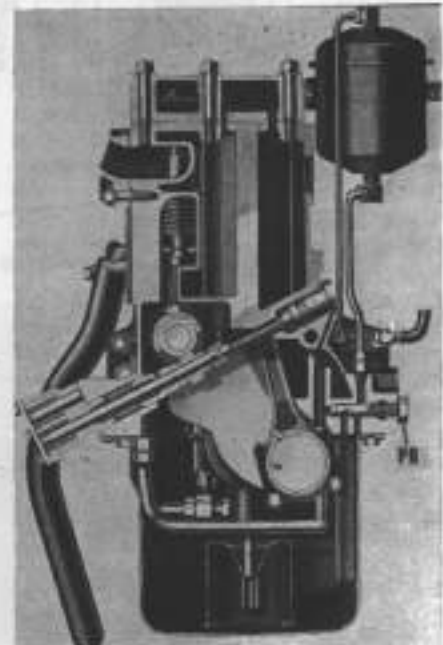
Chrysler 6 cylinder engine cross section front view showing angularly disposed transverse shaft which drives oil pump and distributor at opposite ends. Main bearings and rod bearings are non-adjustable precision type shells. Tappets are mushroom type.
